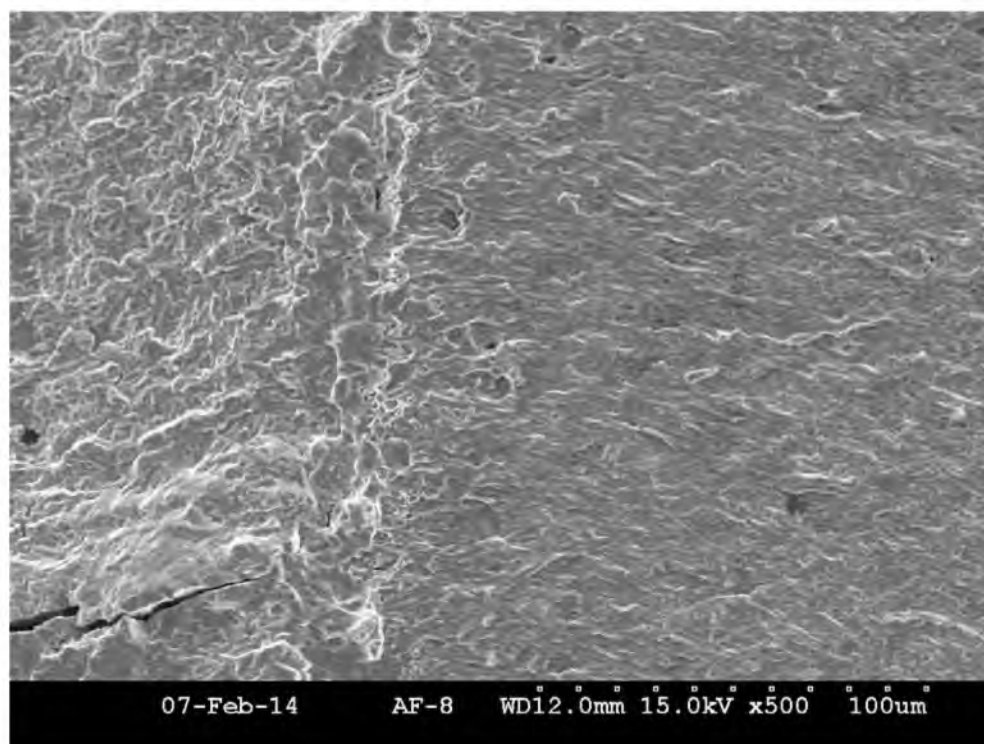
GT270-28 500x End of Fatigue Crack Image
